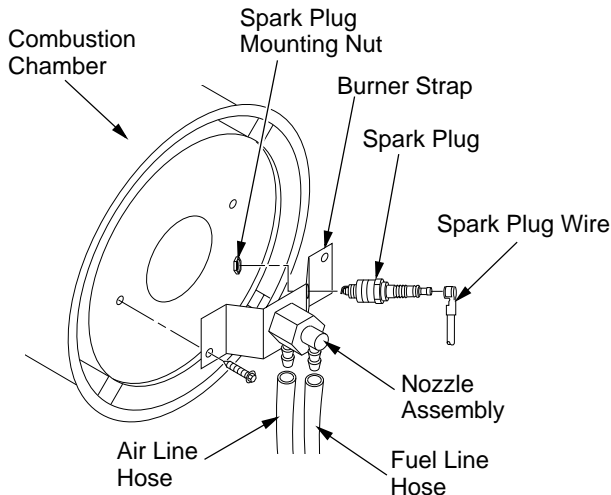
Spark Plug Removal, 35,000 Btu/Hr Model
